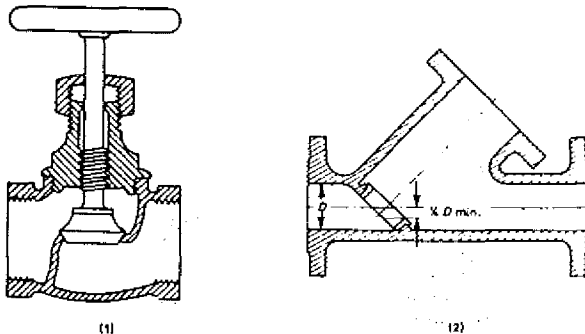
(C) TYPICAL GLOBE VALVES
